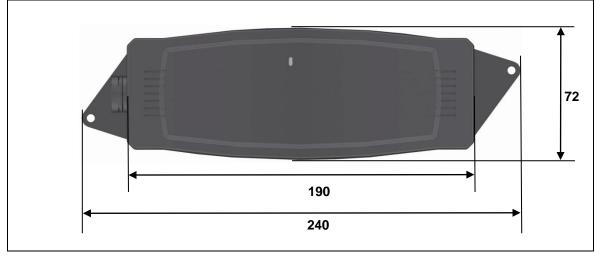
Dimensions of the PD12 POWER SUPPLY (pluggable unit), side view (in mm) A Plug size
